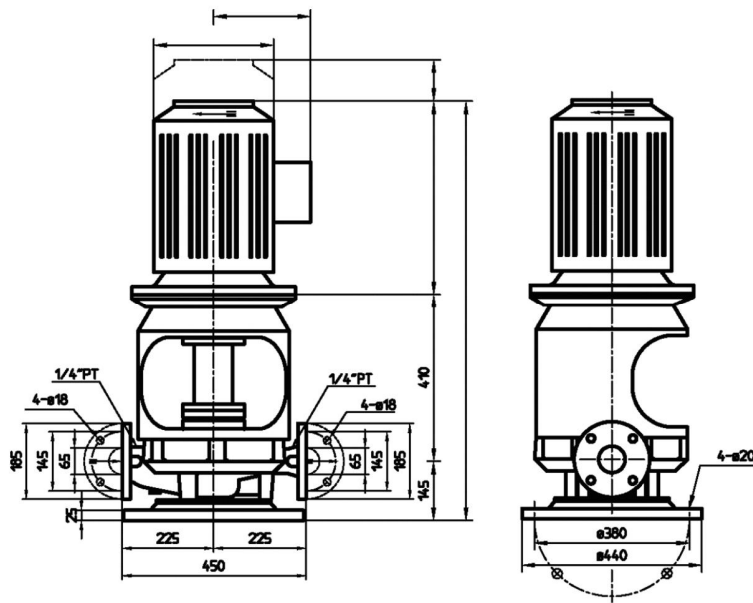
Dimensional drawing of a stand-by circulating pump /22/
